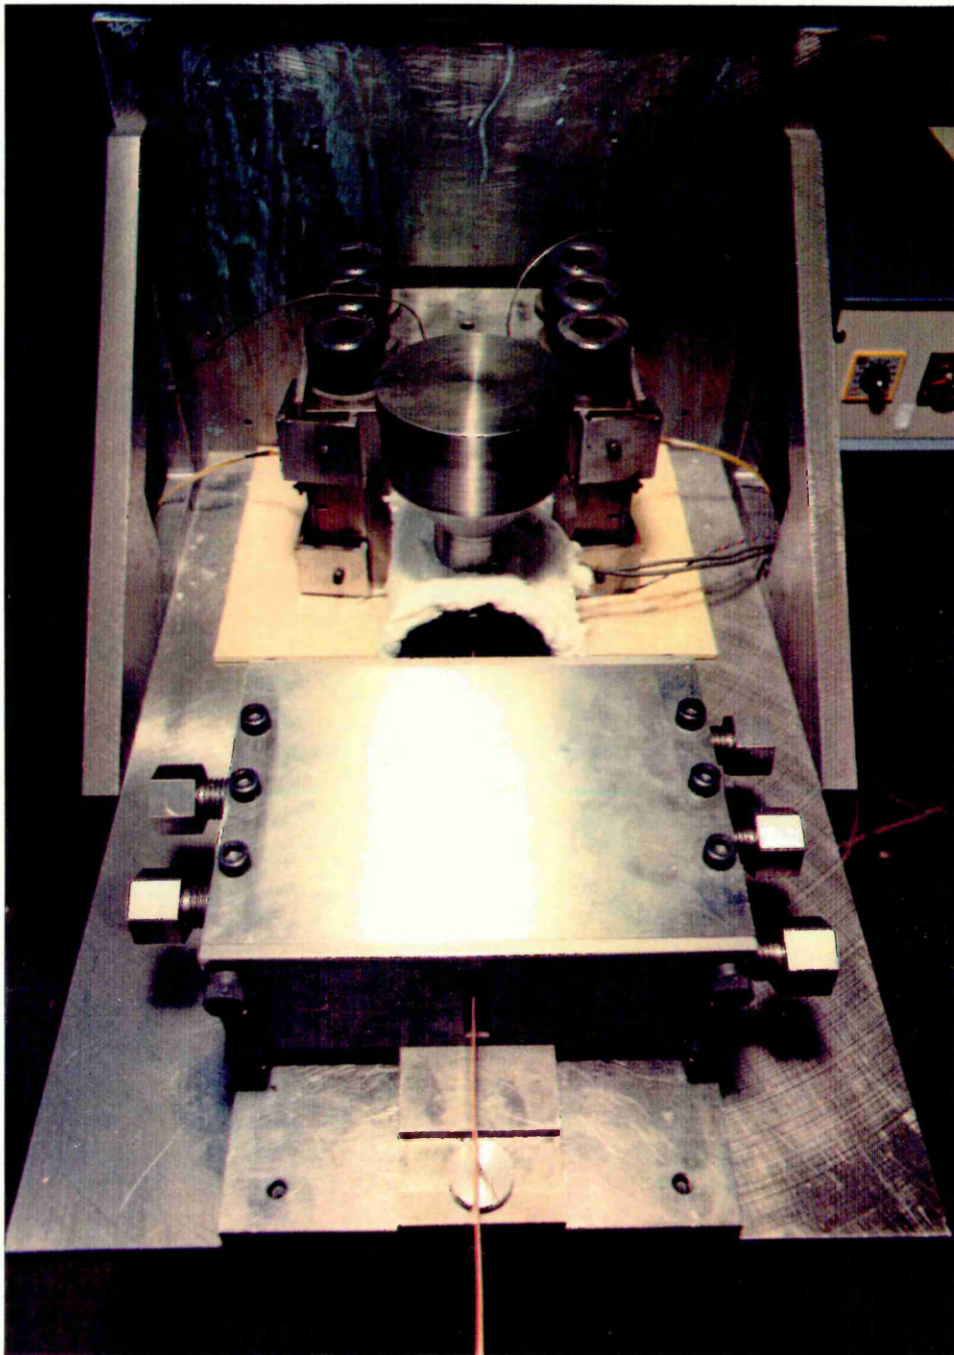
A view of the process line for the Plasto-hydrodynamic drawing process.
